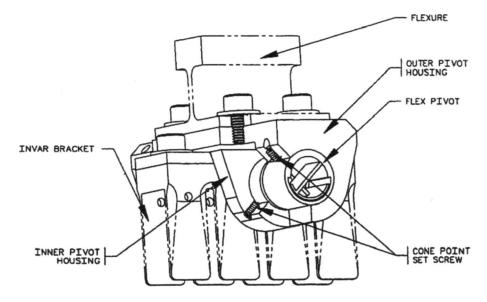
Sectional view of the grating mount assembly showing its adjustment provisions. (From Shipley et al. 25)
